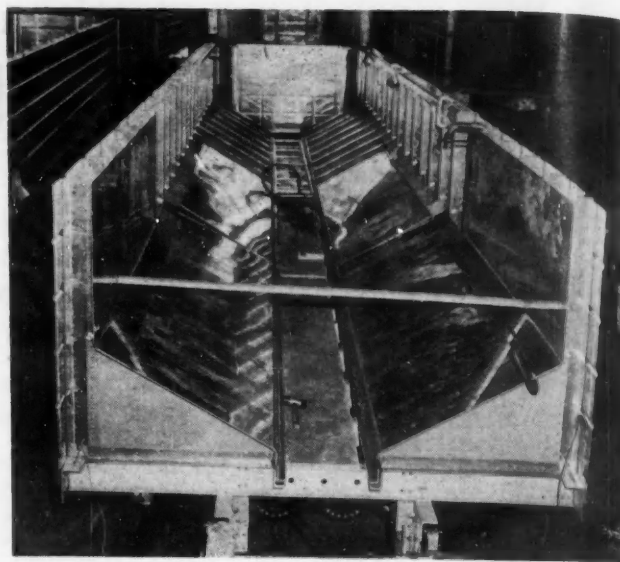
Partially completed 42-ft monocoque V bottom coal trailer. Floor sills and ribs are seen forward. Conveyor belt to be installed in bottom will move at 200 fpm on roller bearing support rolls at 2-ft intervals and will unload 50,000 lb of coal in about 15 min
